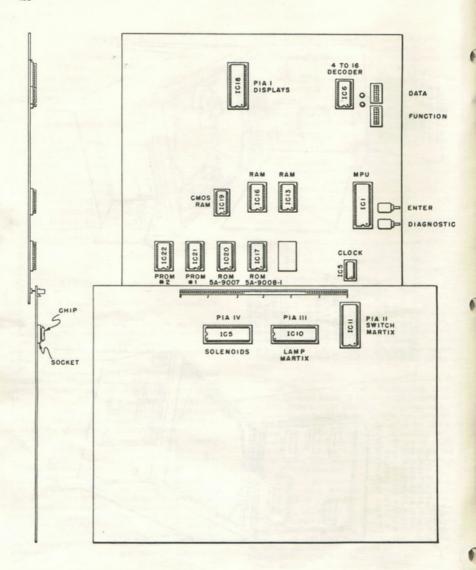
Location of Socketed Components and Switches on CPU and Driver Boards
